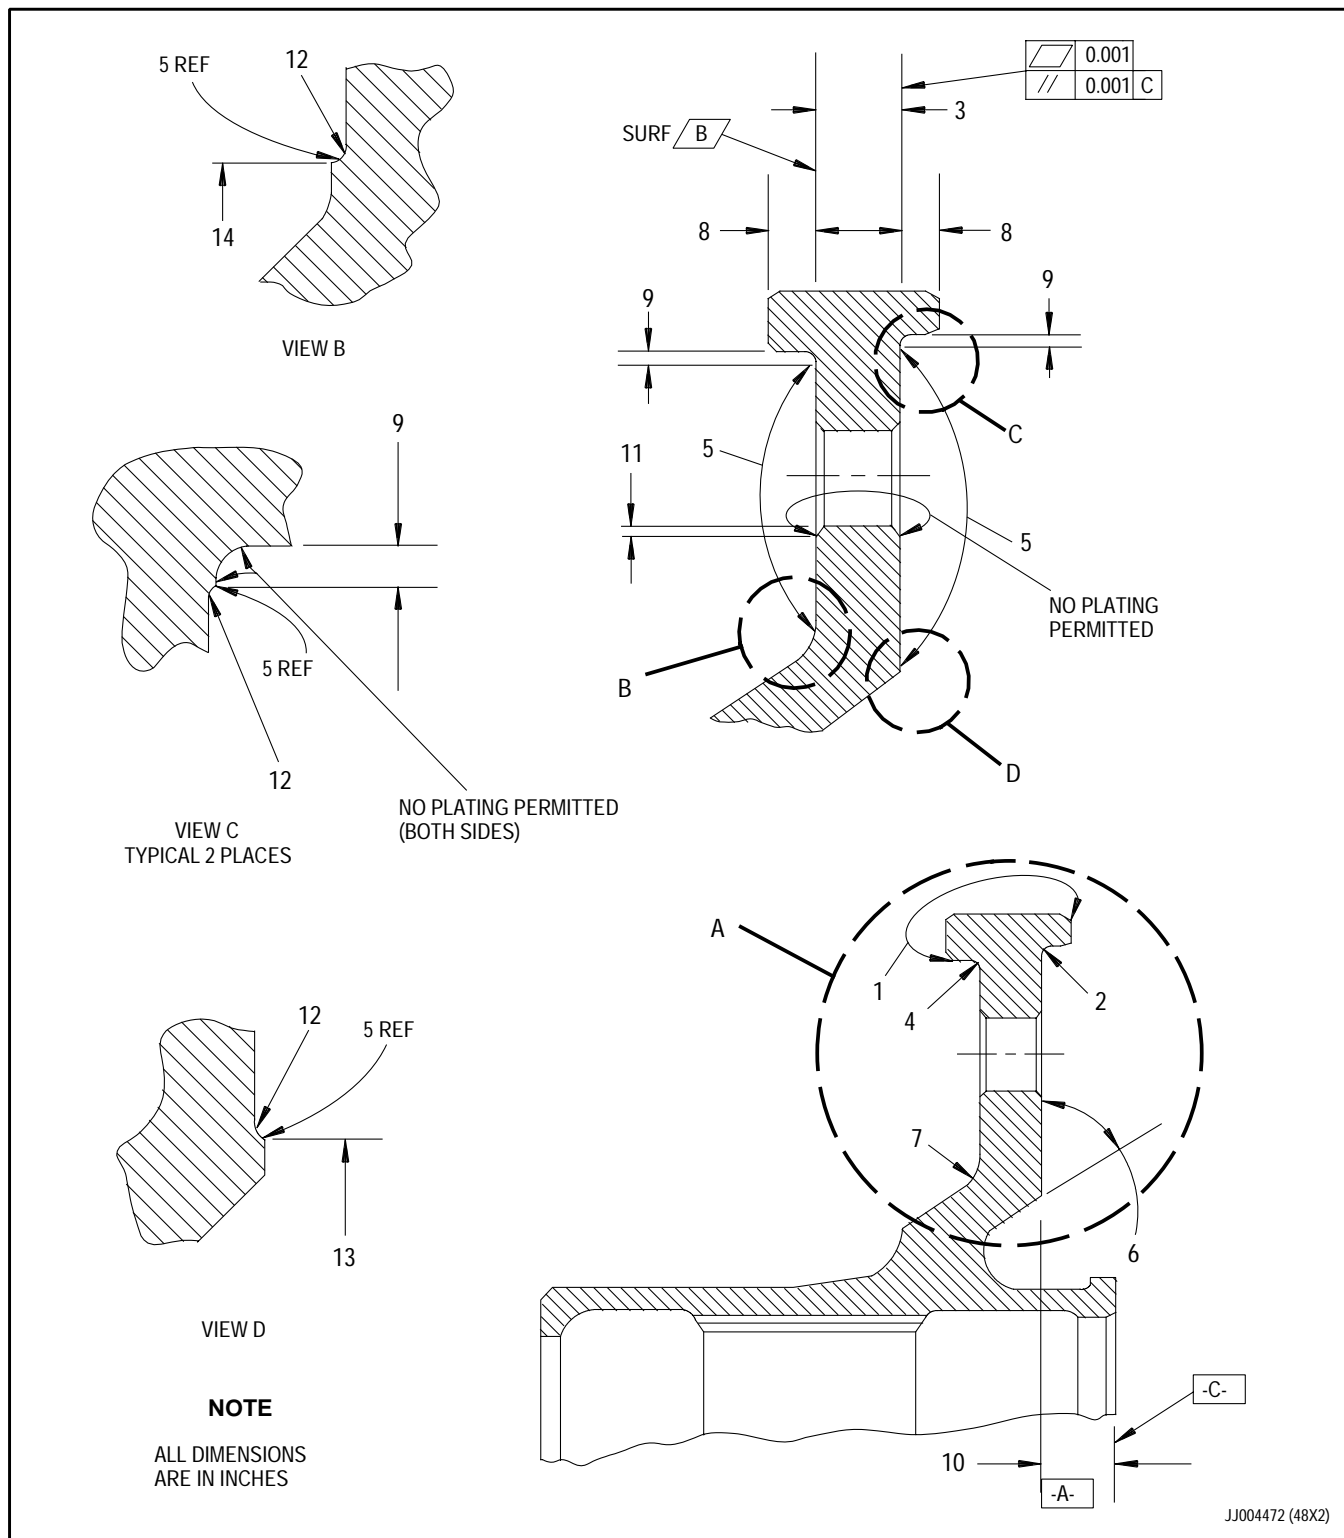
Rear Turbine Hub Assembly - Disks and Air Seals Mating Face - Repair
